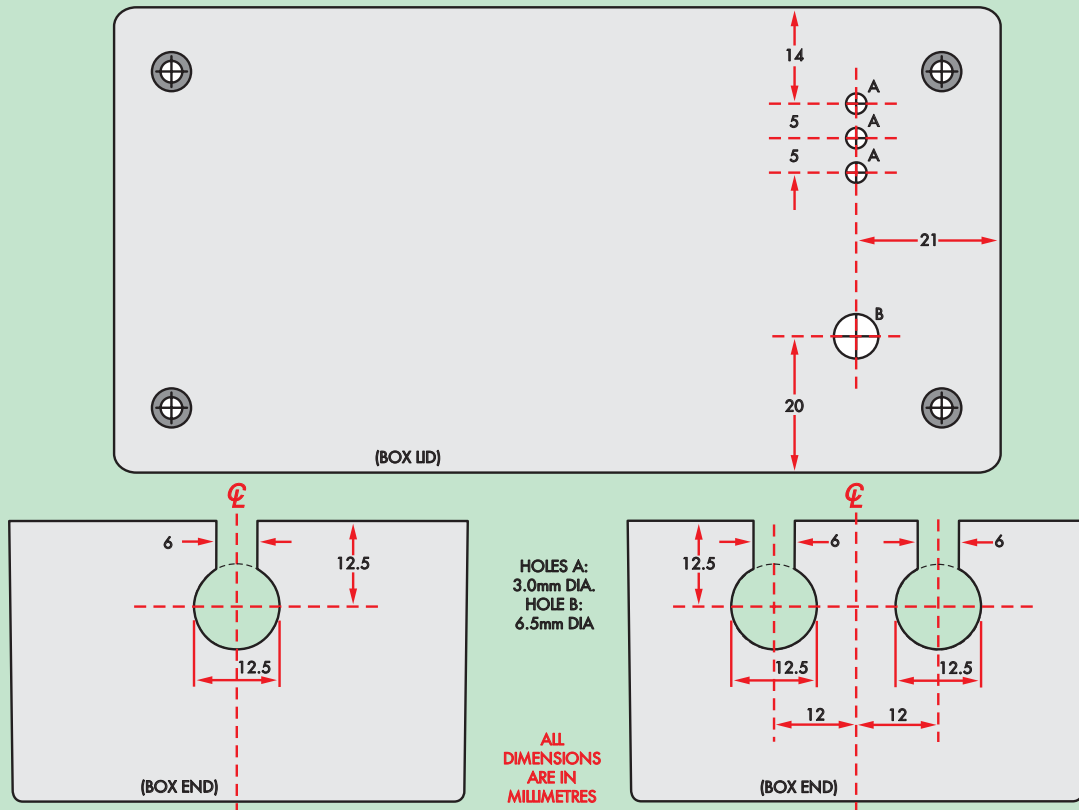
this diagram shows the drilling details for the lid and the two ends of the case. The larger holes (ie, >3mm) are best made by first using a small pilot drill and then carefully enlarging them to the correct size using a tapered reamer.
